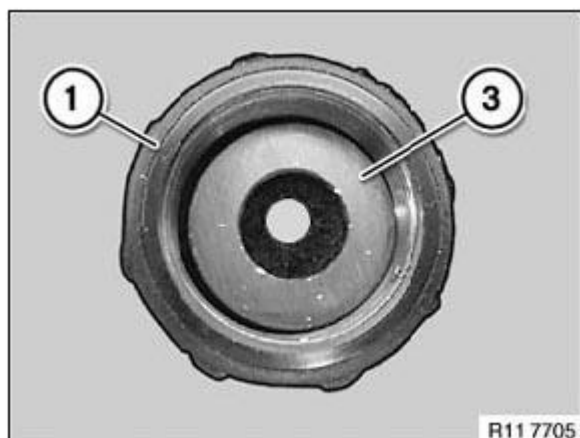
Identifying Felt Washer And Valve Cage
